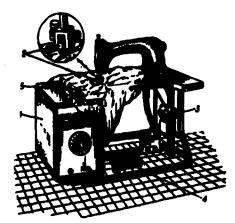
Roller machine for welding plastics with high-frequency current: 1) High-frequency generator; 2) rollers; 3) drive motor; 4) control pedal; 5) film to be welded.
